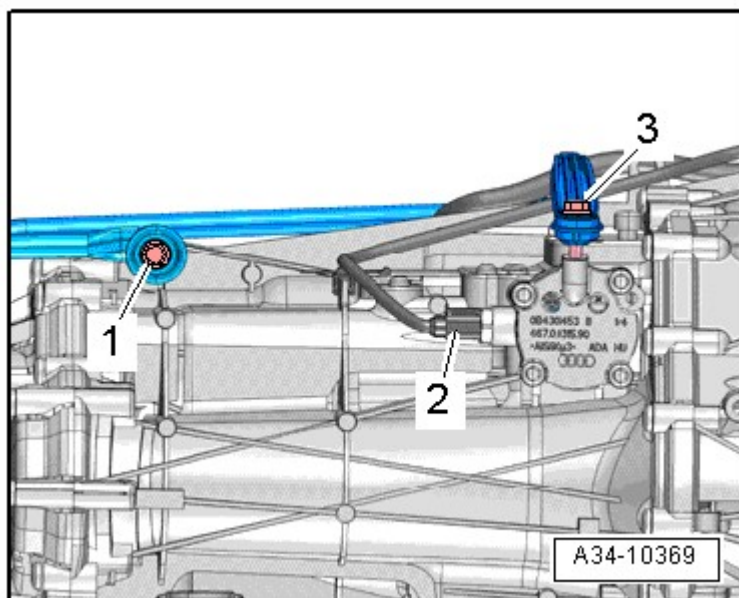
Attaching Bolts And For Selector Rod And Push Rod
